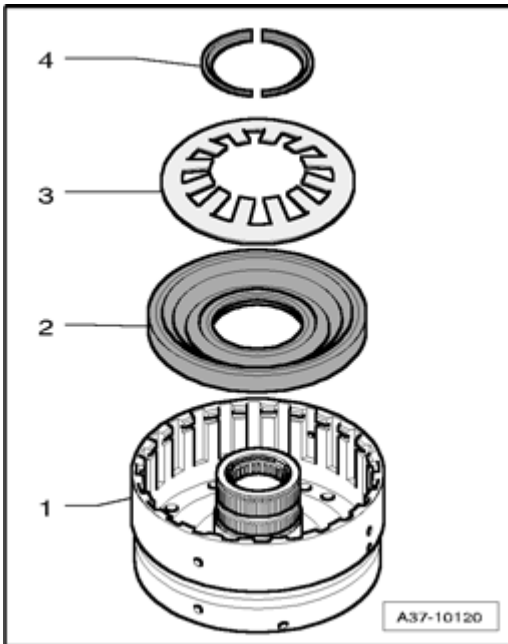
Cylinder "F", Piston "F" And Dished Washer
